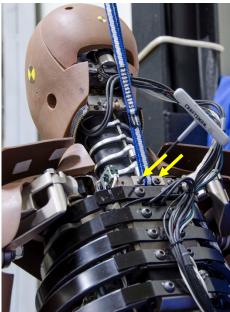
Install lifting strap bracket to upper thoracic spine box weldment
